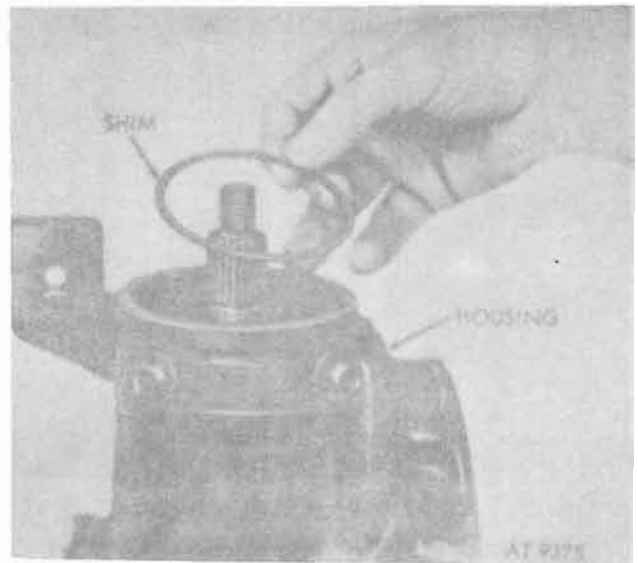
Positioning pinion gear shim(s) in housing bore.
